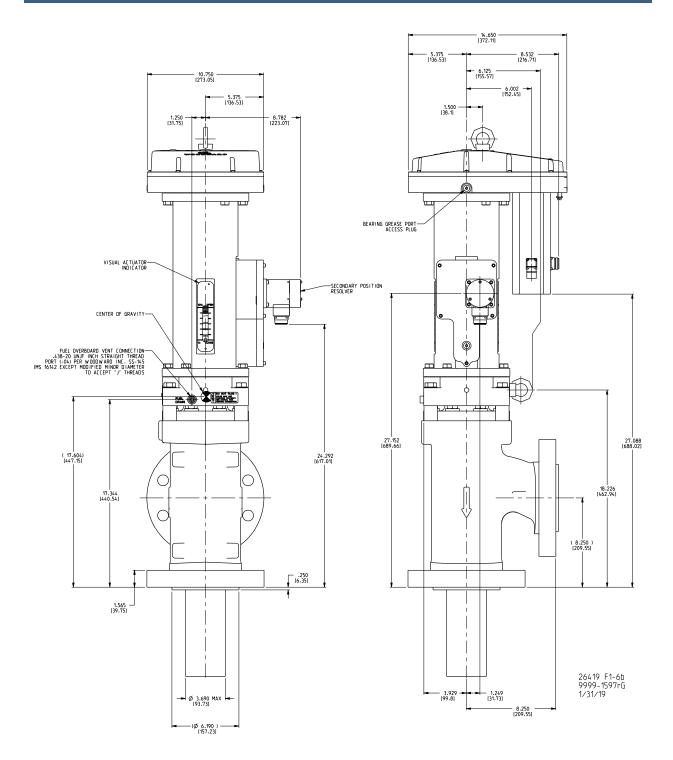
Outline Drawing (4-Inch LESV Class 600)
